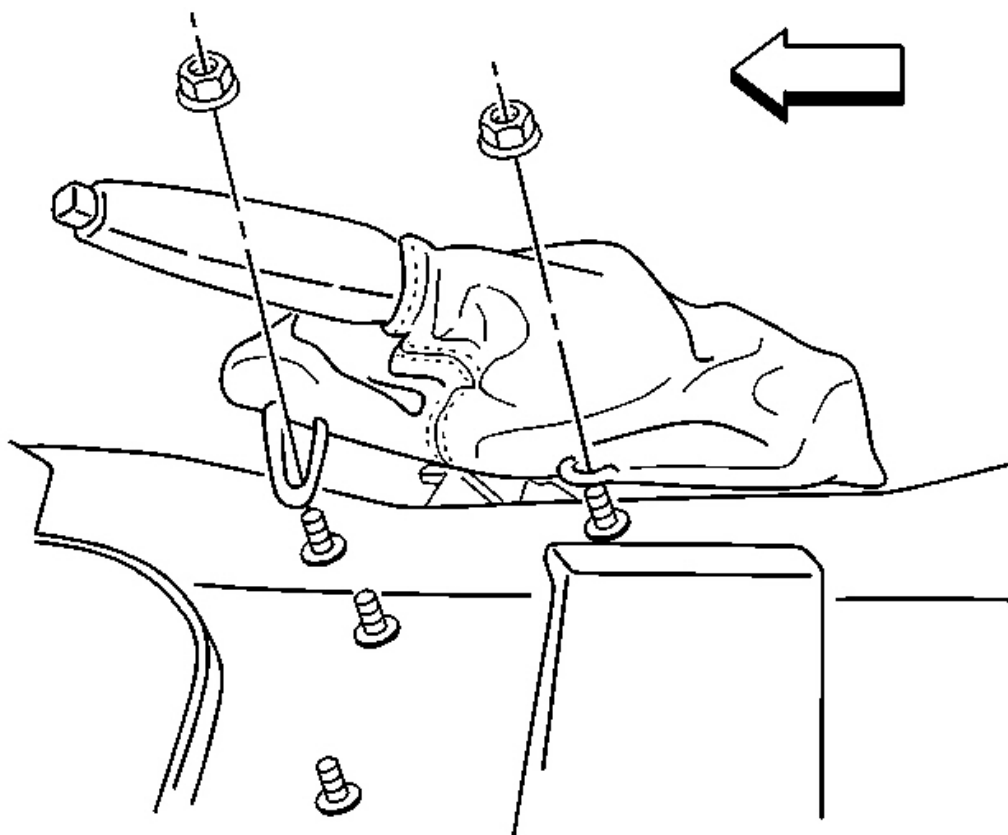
Disengage Retainer Clips On Park Brake Lever Boot
